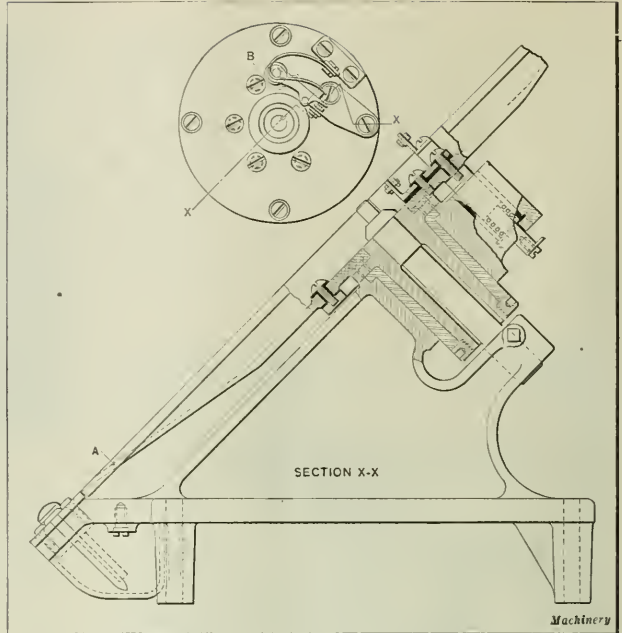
Sectional View of Lobe Spacing Inspection Gage shown in Fig. 19
